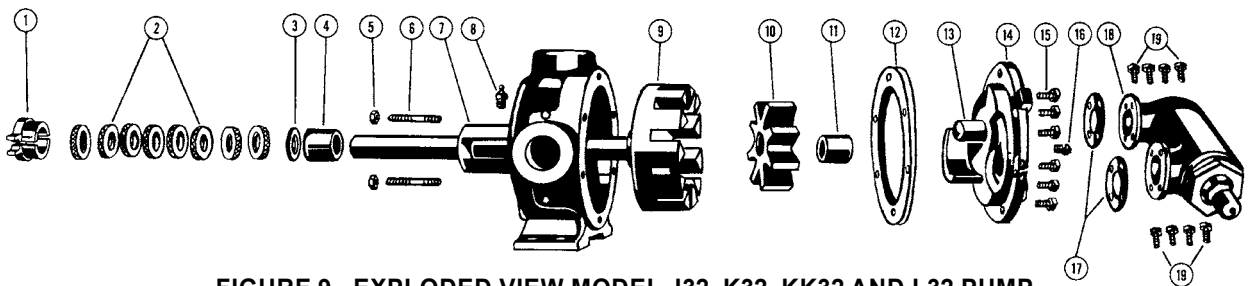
EXPLODED VIEW MODEL J32, K32, KK32 AND L32 PUMP
